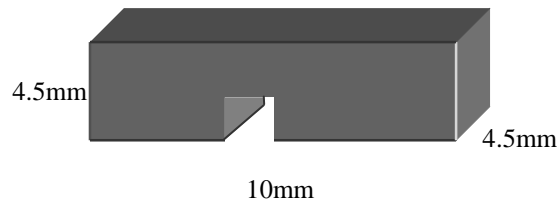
Dimensions of the cut bar of stainless steel showing the saw cut for oxidised face determination
